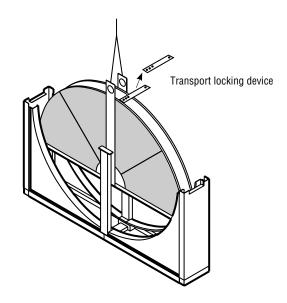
3. Remove the protective panels and transport locking devices of the rotor. Lift out the rotor half.
